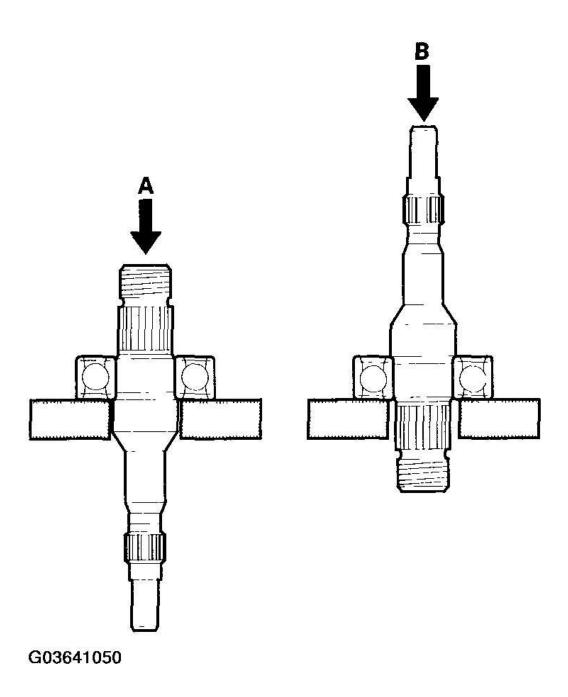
Installing Ball Bearing Courtesy of AMERICAN HONDA MOTOR CO., INC.
